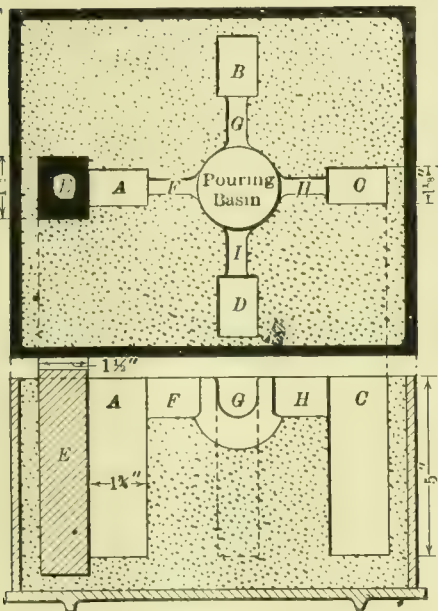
MOULD FOR TEST BARS THAT SOLVED INSIDE CHILL PROPERTIES.
